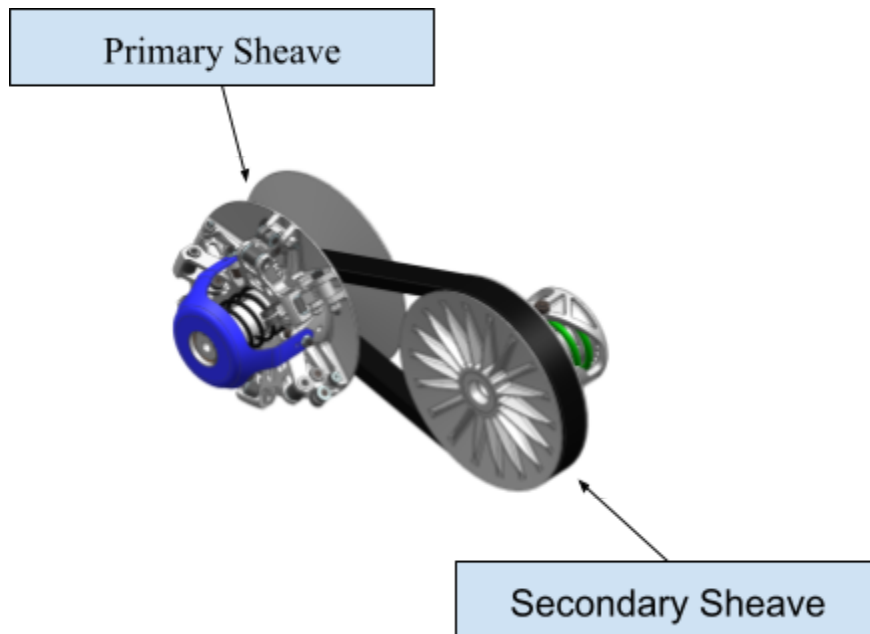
Custom CVT developed by the MBR Team. This CVT consists of two pulleys, called the primary and secondary sheaves, joined with a rubber v-belt.
